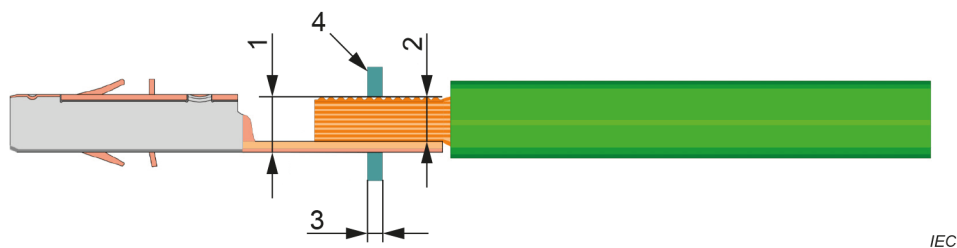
Top view of an ultrasonically welded wire on a terminal
